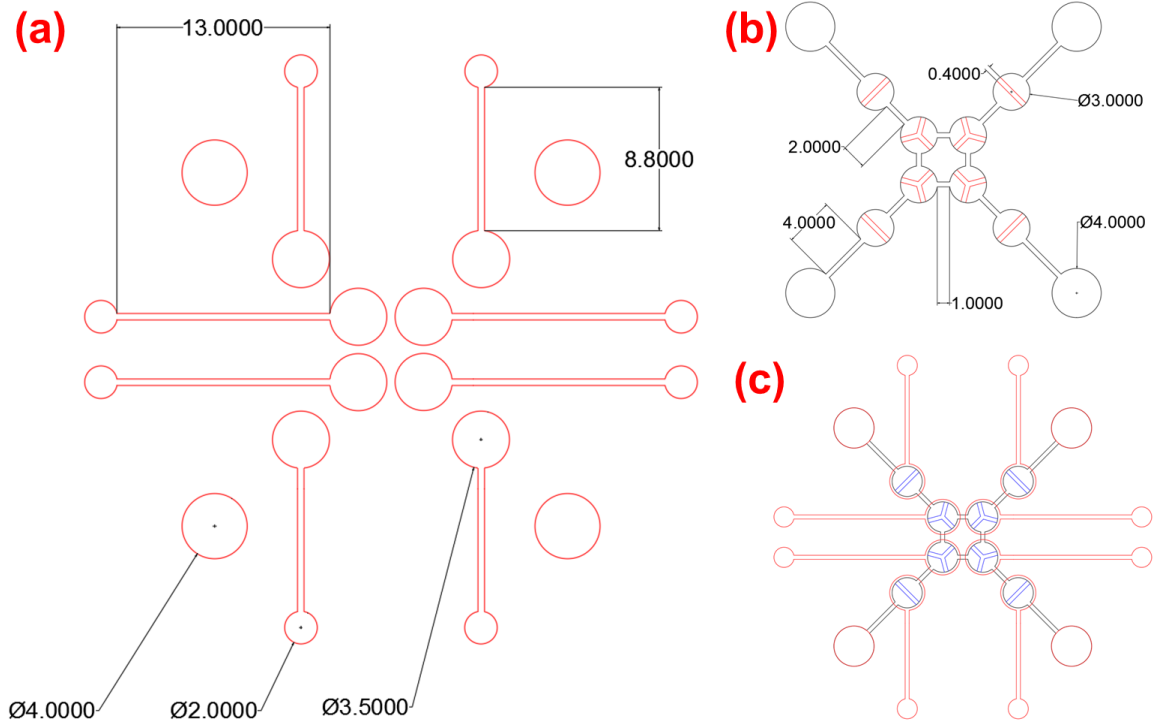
Design of a pneumatic lifting gate microfluidic processor. (a) Pneumatic layer design and dimensions. (b) Fluidic layer design and dimensions. (c) Layers aligned. All dimensions are in mm.
